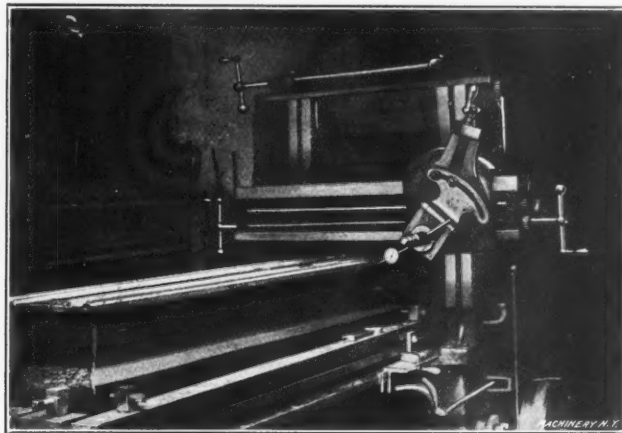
Testing Parallelism of the Outer Edge and Ways of a Lathe with the Test Indicator
